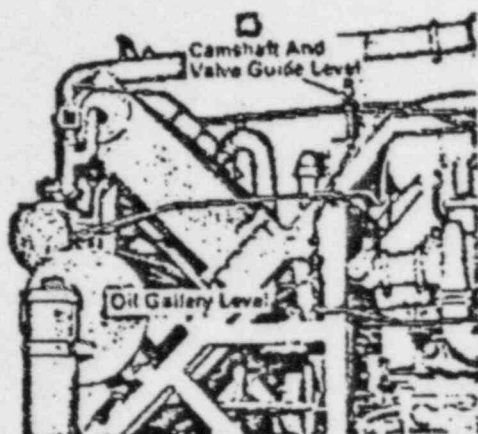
Vant And Sight Glass Piping. Typical Installation
